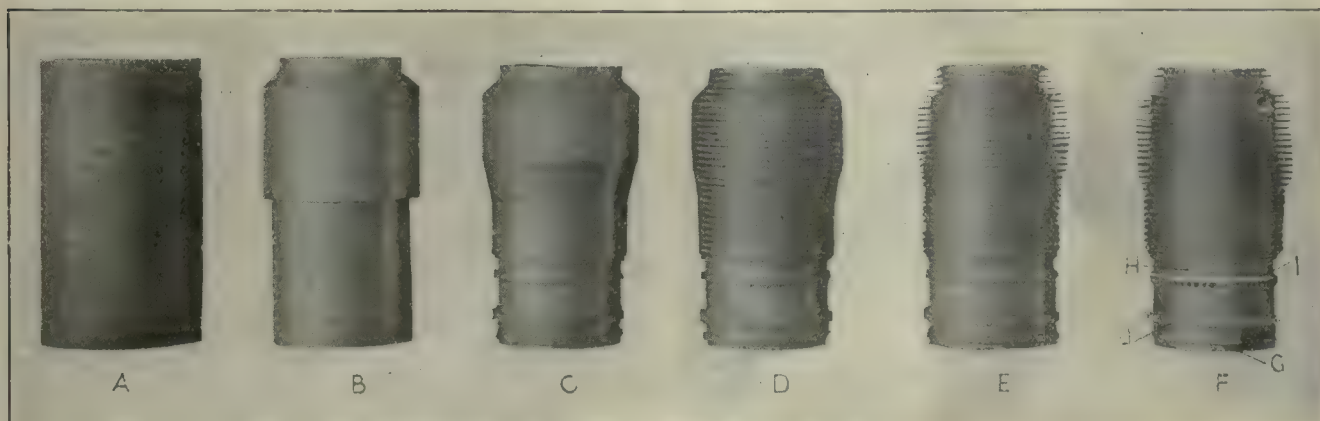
FROM BILLET TO FINISHED CYLINDER
